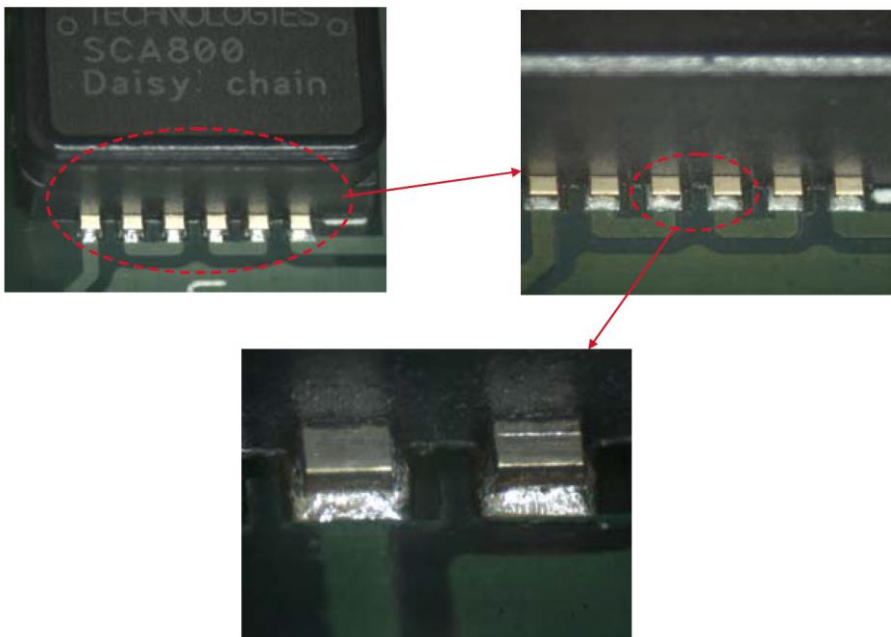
Soldered DFL component on PCB. Solder joints are partly located underneath theDFL component itself
